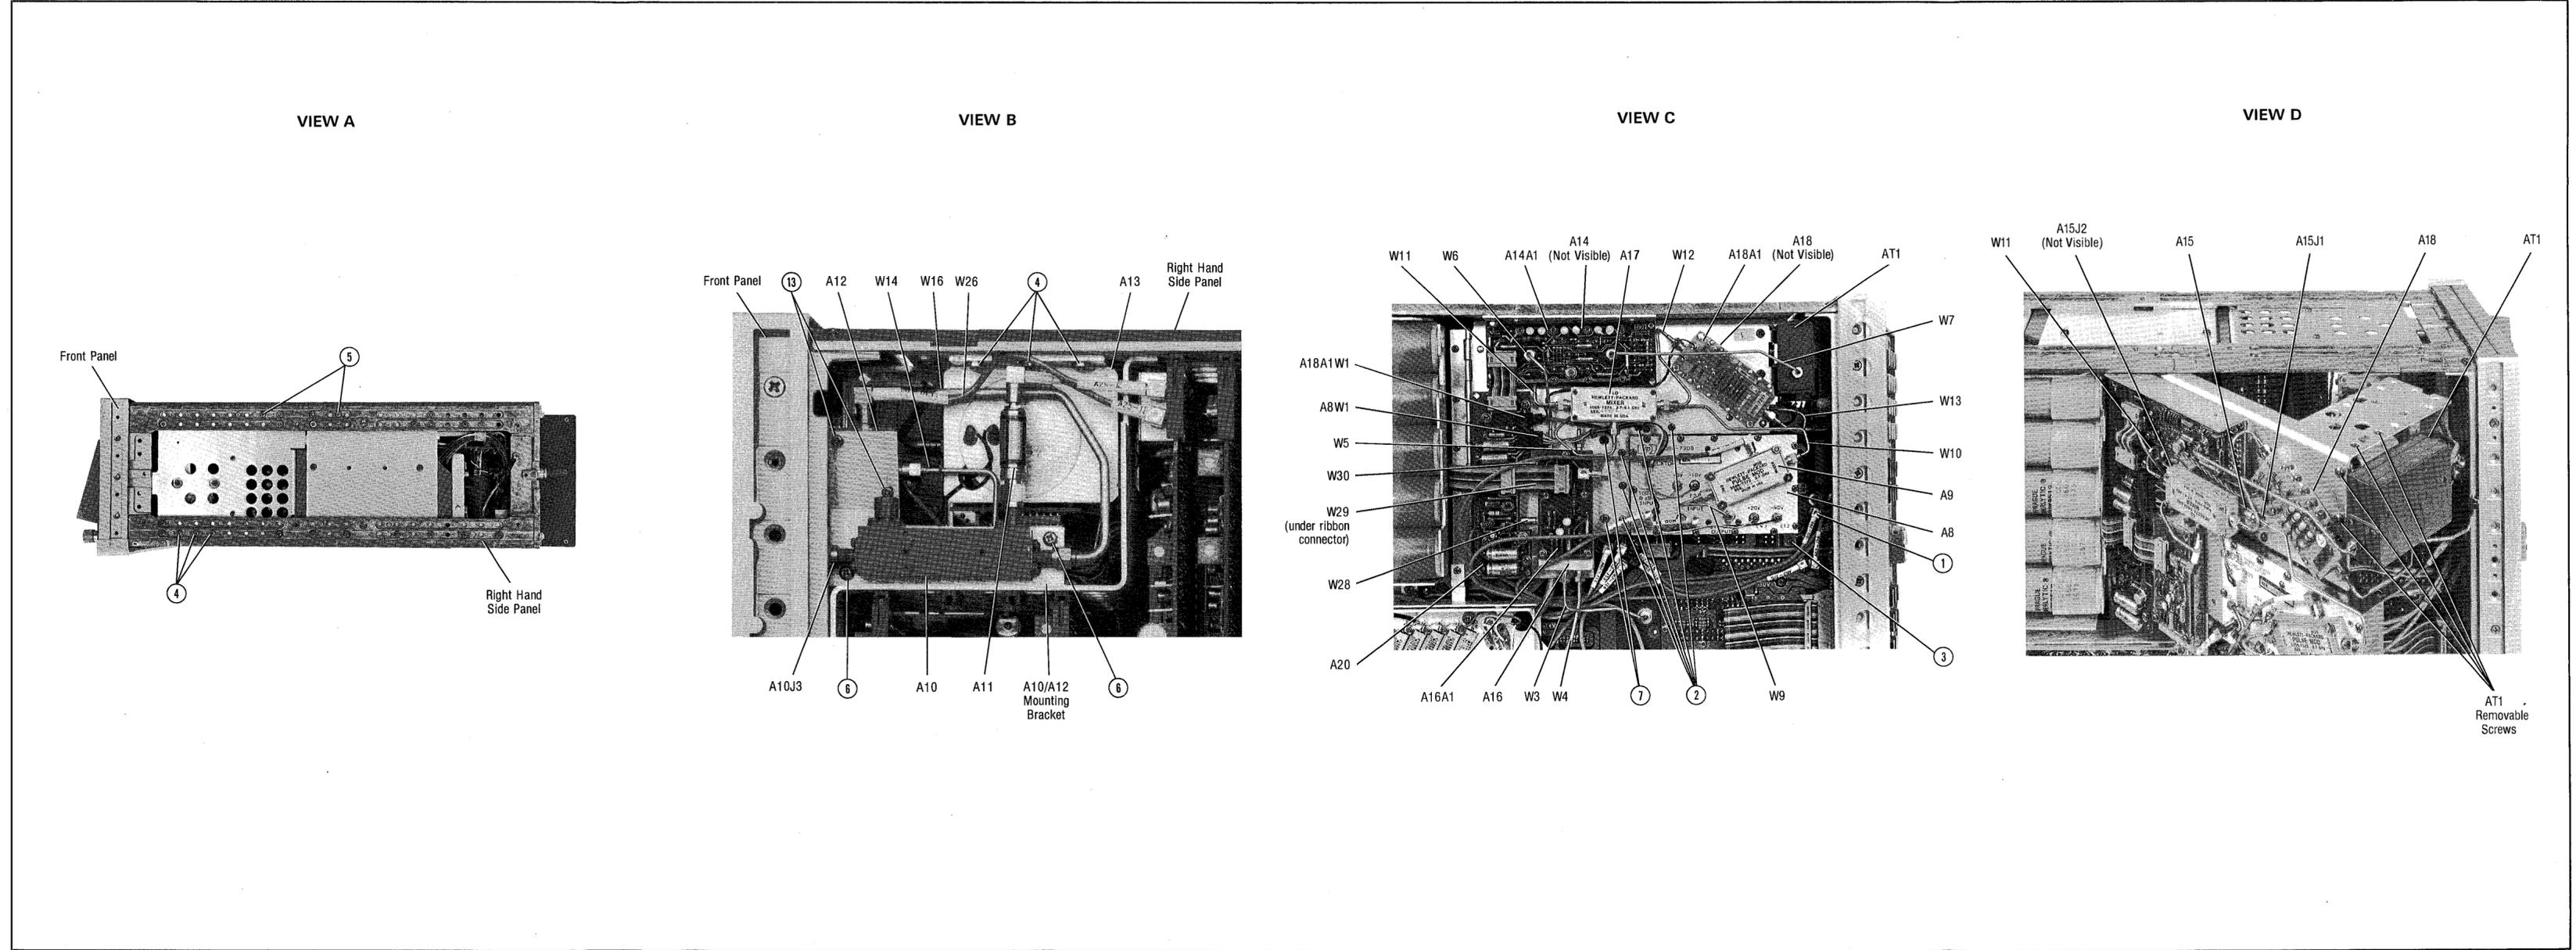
I-8. RF Assemblies, Cables, Mounting Hardware Location
